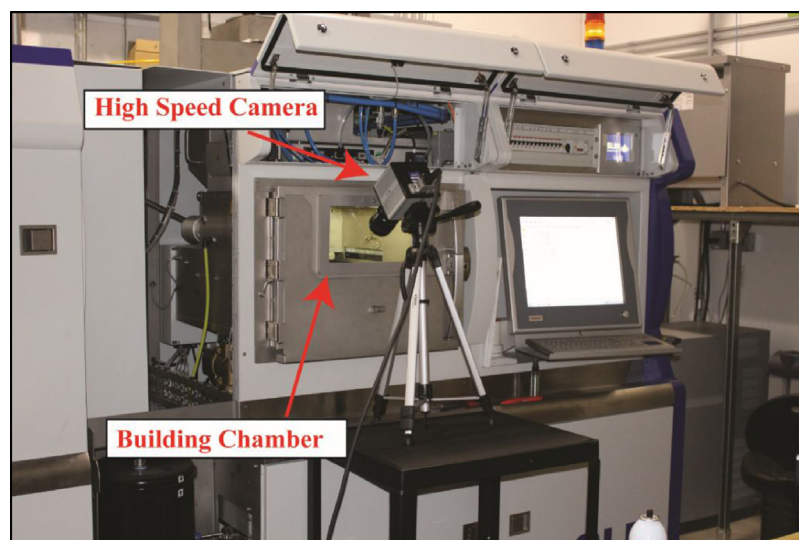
A Fastcam 1024 PCI high-speed camera is placed in front of a 2800 SLMHL machine to capture the manufacturing process. The building chamber is bright enough to support high-quality high-speed video photography.
